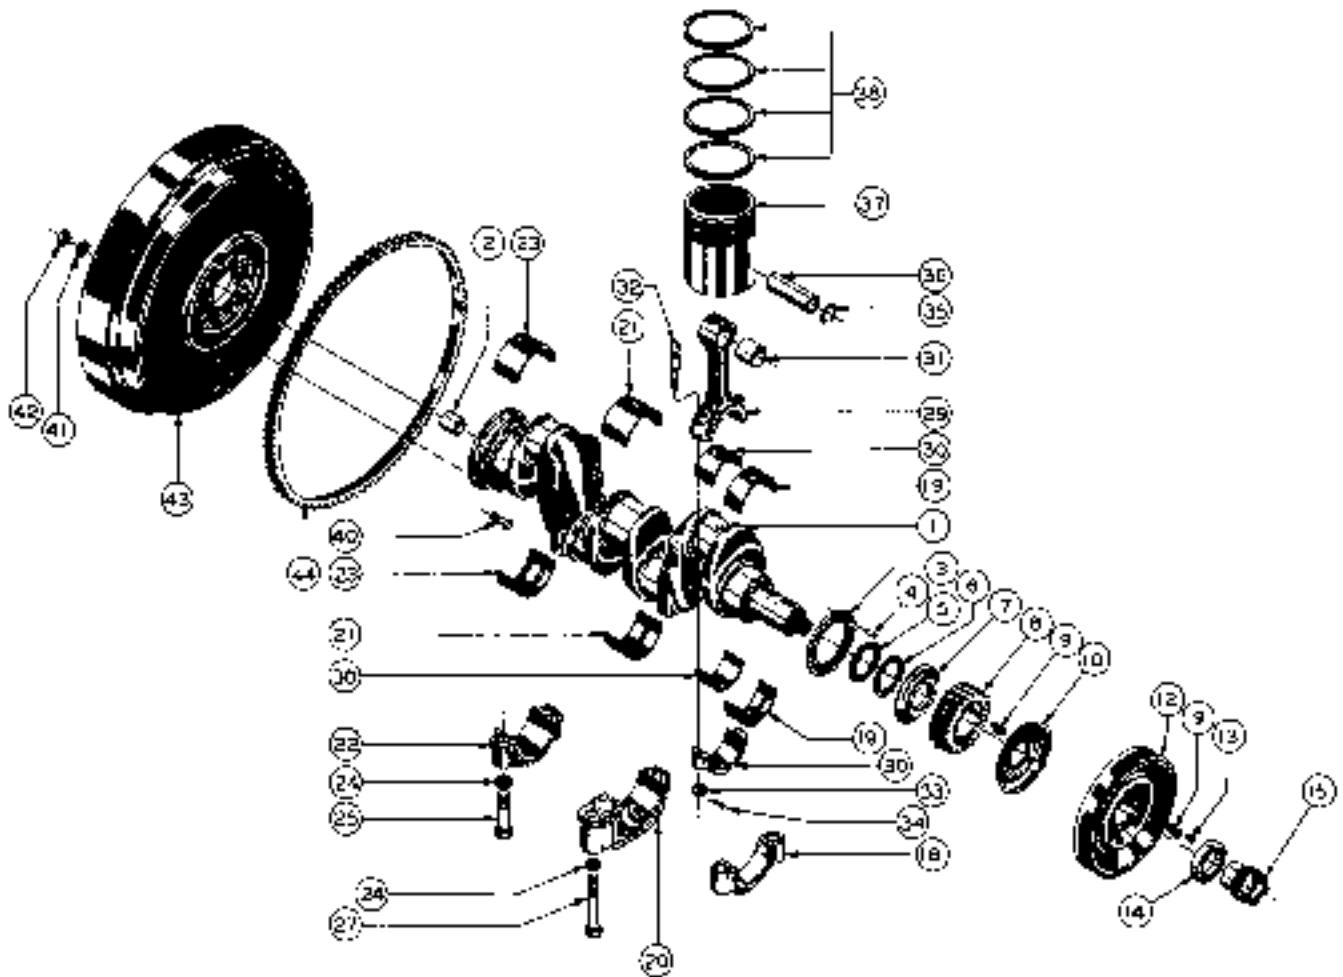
CRANKSHAFT, FLYWHEEL, CONN. RODS AND PISTONS
